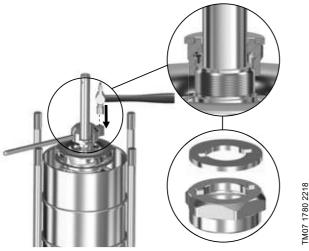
Loosening the impeller (49 or 49a) with service tool Q
